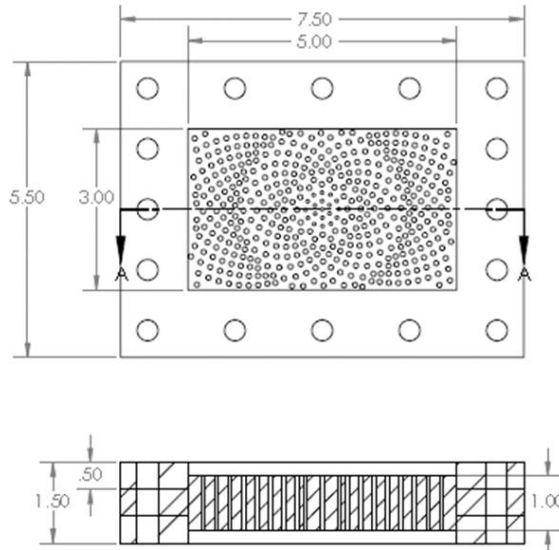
Schematic of the flow straightener, dimensions in inches
